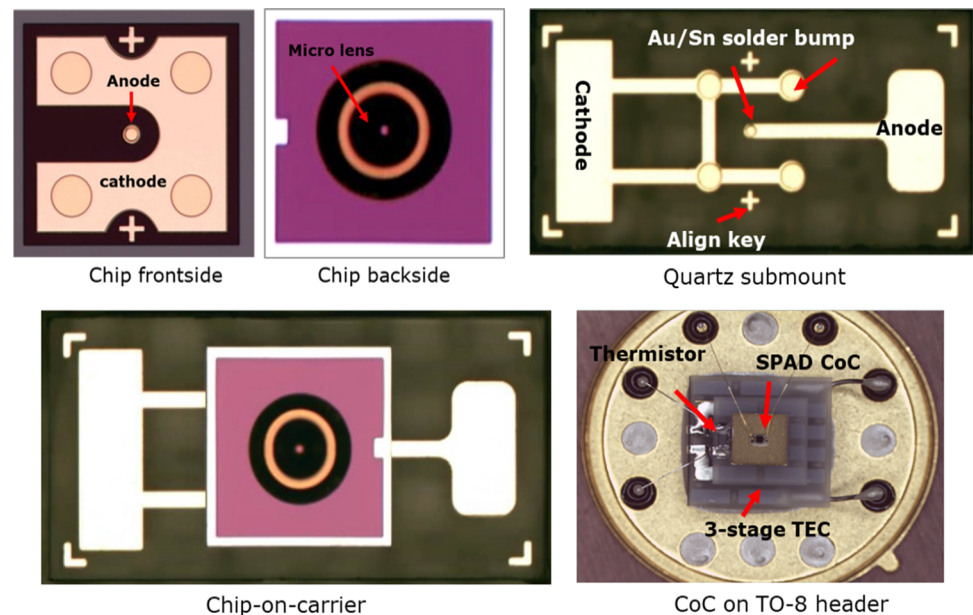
Photograph of the fabricated SPAD chip-on-carrier (CoC) and TO-8 header
